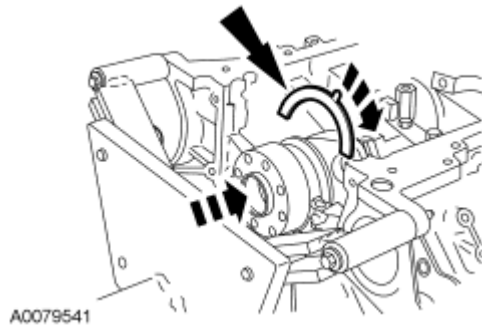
Identifying Front Upper Crankshaft Thrust Washer
